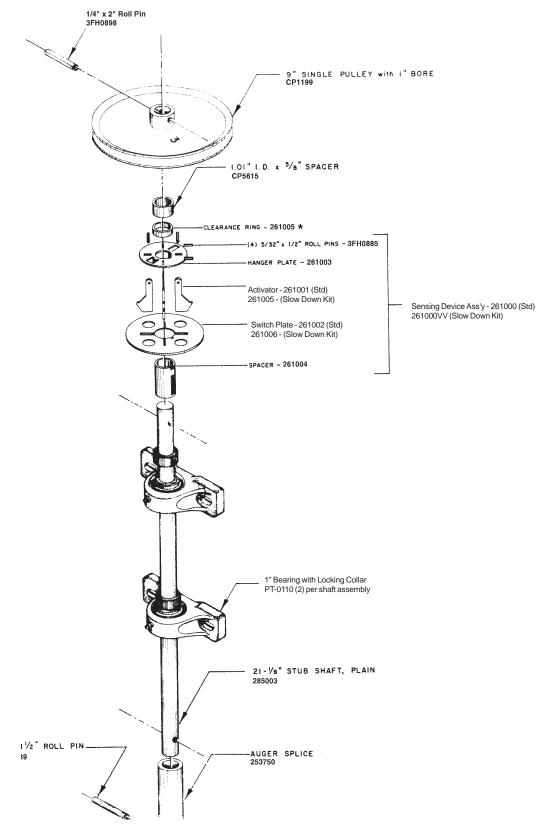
Stub Auger Assembly No. 3 (2800031)
